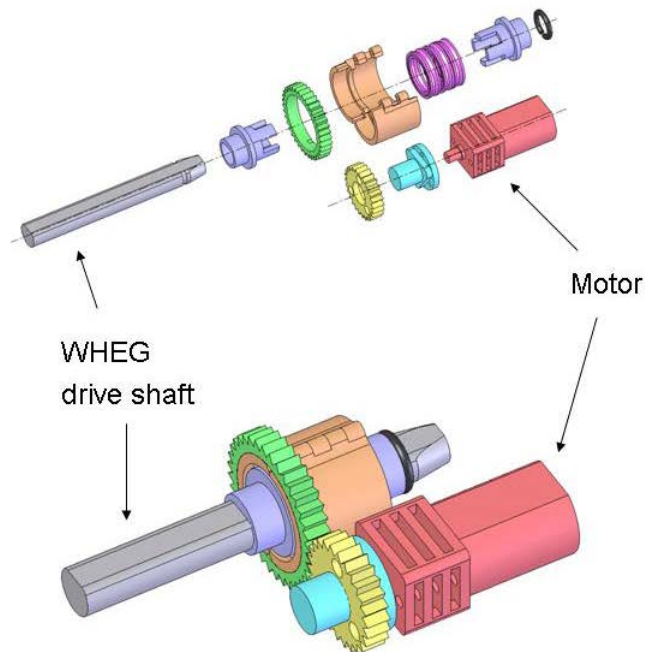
Clutch Schematic Exploded and Fully Assembled [From 14].
